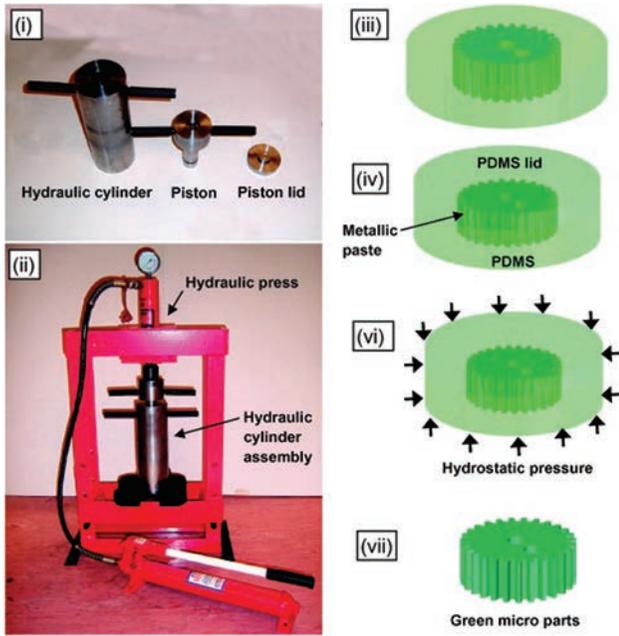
Schematic diagram of the cold isostatic pressing technique. Reprinted with permission from [176], M. Imbaby, et al., Fabrication of 316-L stainless steel microcomponents using encapsulating soft mold and isopressing technique. *Microelectronic Engineering* 87, 1623 (2010). © 2010, Elsevier.
